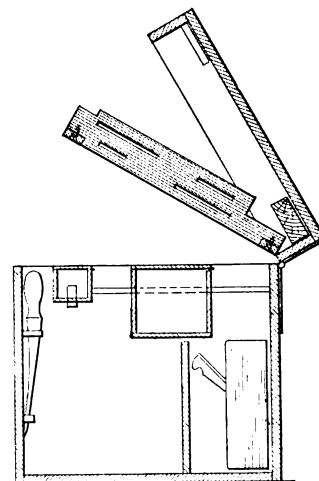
Cross Section, Showing Construction and Arrangement of Interior.
